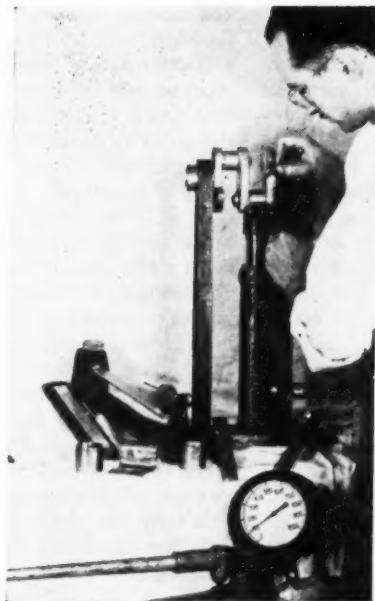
STATIC BENDING STRESS BEING APPLIED TO CRANKSHAFT
